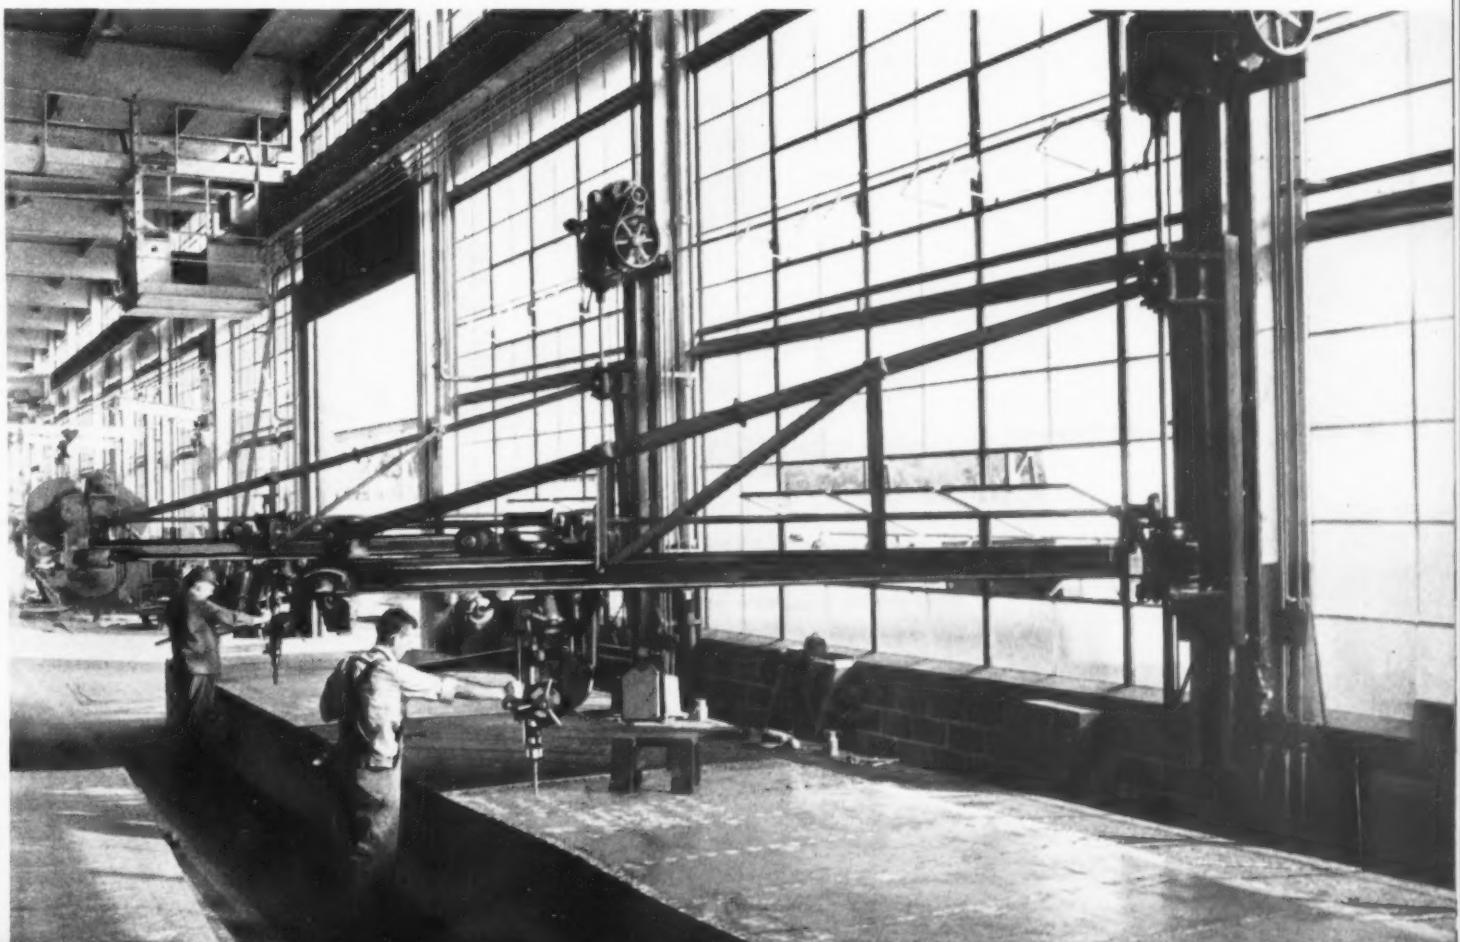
(Below) Wall-bracket Drilling Machines Drilling Rivet Holes in High-tensile Steel Plates for Destroyer Hulls
